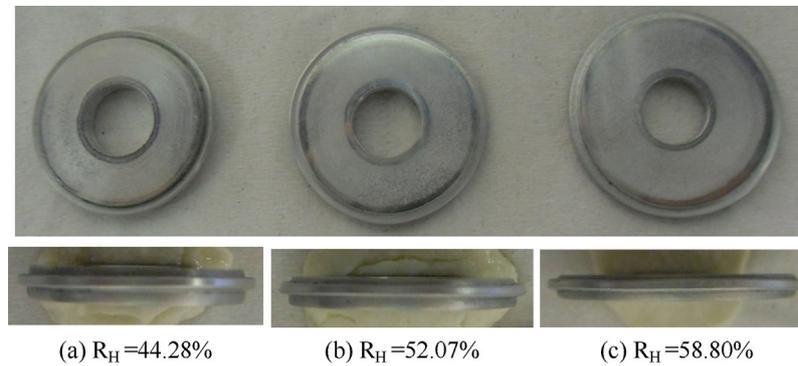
The ring workpiece with outer boss after compression with different lubricating conditions between the upper and lower die–workpiece interfaces.
